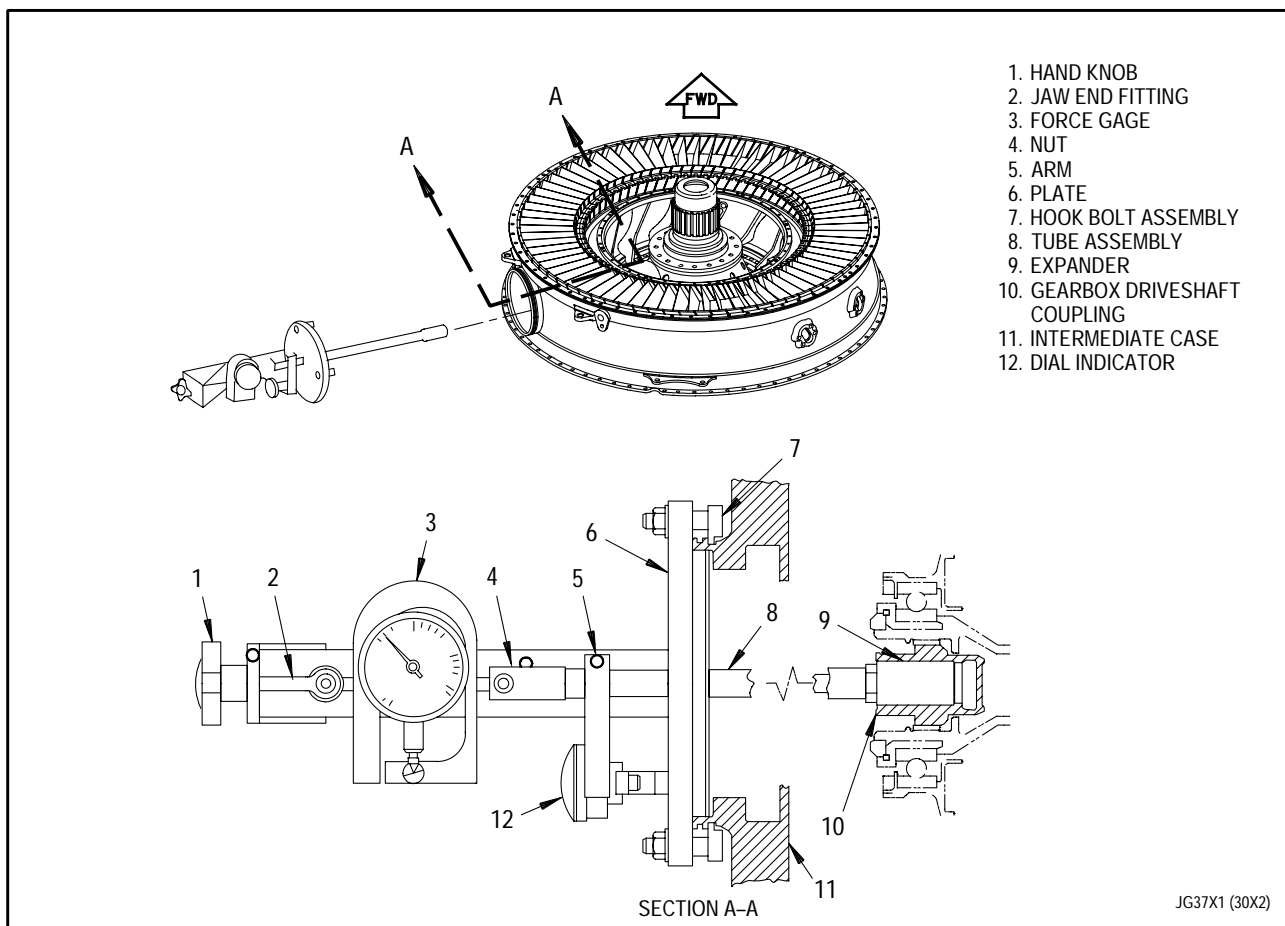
Gearbox Drive Bevel Gearshaft and Gearbox Drive Bevel Gear - Backlash Check Using PWA 51154 Gage
